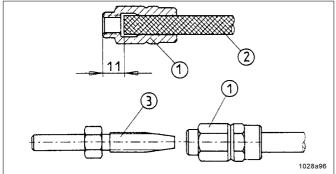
Preassembly of the threaded sleeves and hose studs on the high - pressure plastic hose
